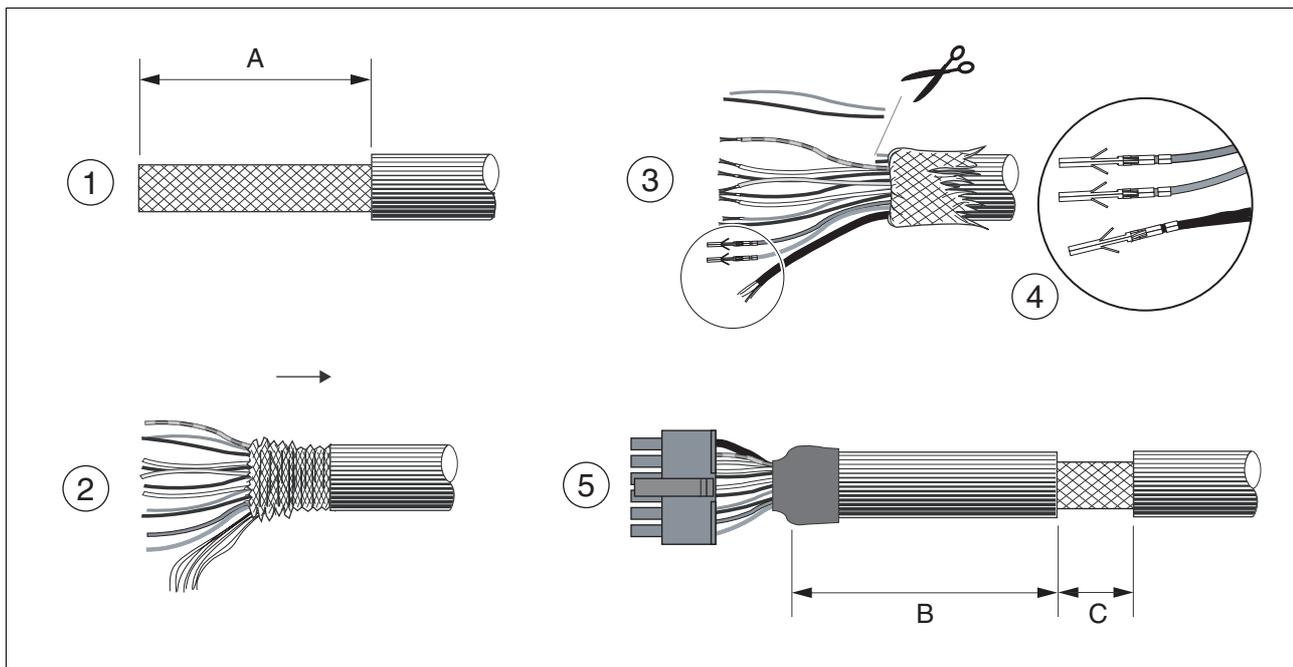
Steps (1-5) for fabrication of the sensor cable
